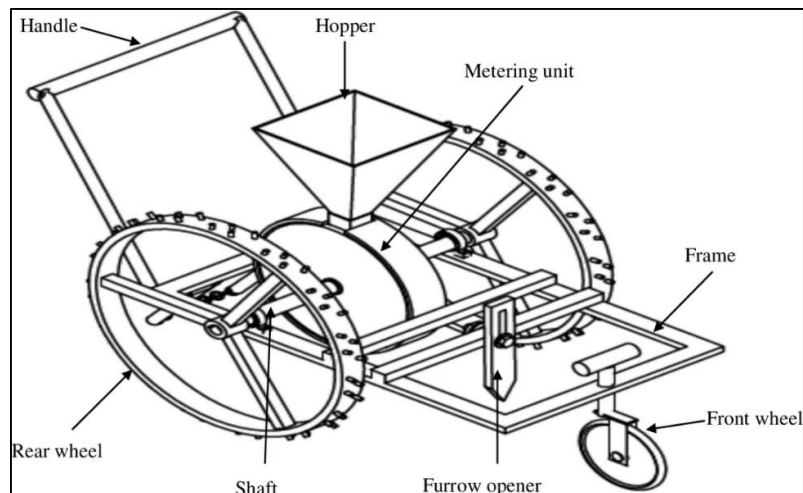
A simplified Seed sowing machine. Adapted From (Soyoye, et al., 2016).
